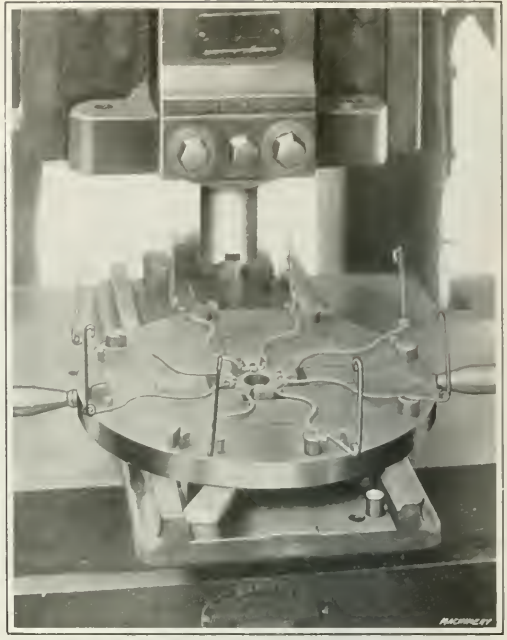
Punch and Die for assembling Wire Arms and Center Plate
